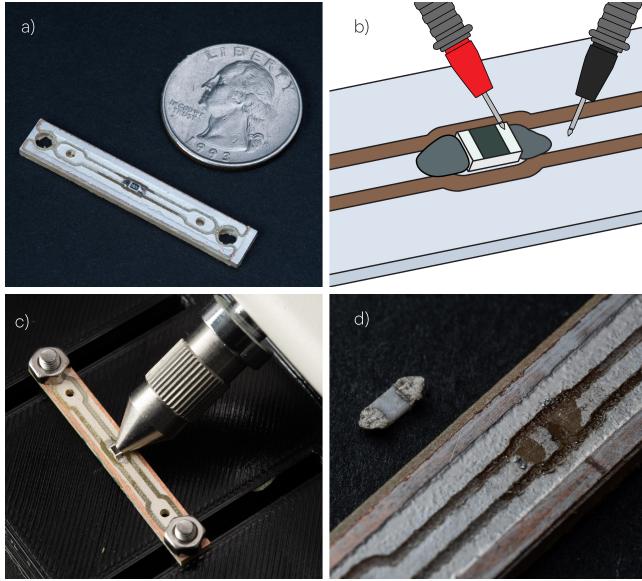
Solder joint experiment: a) an example of a solder joint experiment sample, b) the probing location adopted when measuring solder joint resistance, c) force gauge pressing on the soldered resistor at 30-degree angle, d) epoxy trace failure while the solder joint stays intact.
